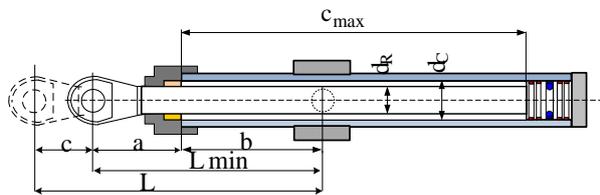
The main kinematic dimensions of a hydraulic cylinder hinged on the cylinder tube
